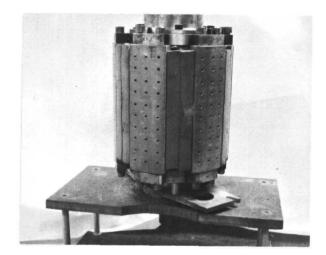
GENERATOR CORE ON ASSEMBLY TOOL
